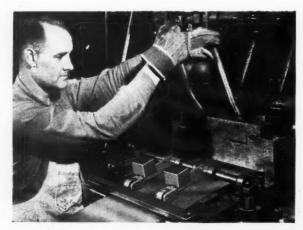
The end of the new roll of stock is trimmed with the aid of the trimming device shown here.
